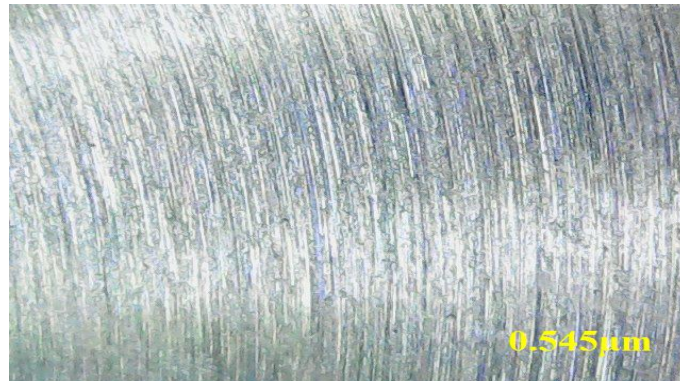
Machined surface images of AA5083 material (x25) d=0.5mm (a) Operator A (b) Operator B (c) SRCS (Cont.)
